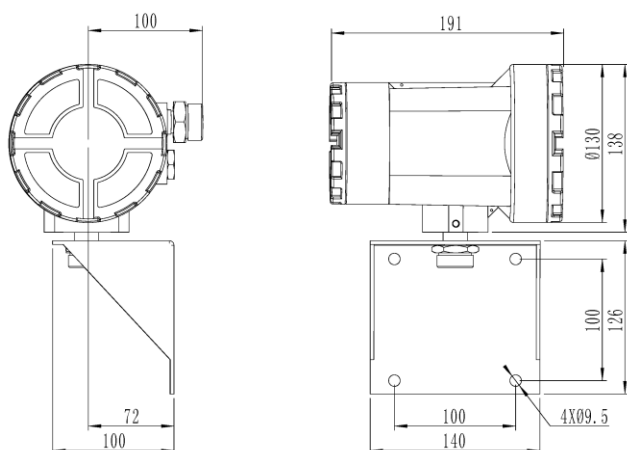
The overall dimensions of T1000 transmitter and mounting holder for separated flowmeter.
